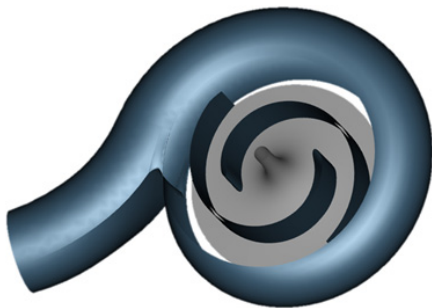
Three-dimensional 2 vane pump impeller and volute
